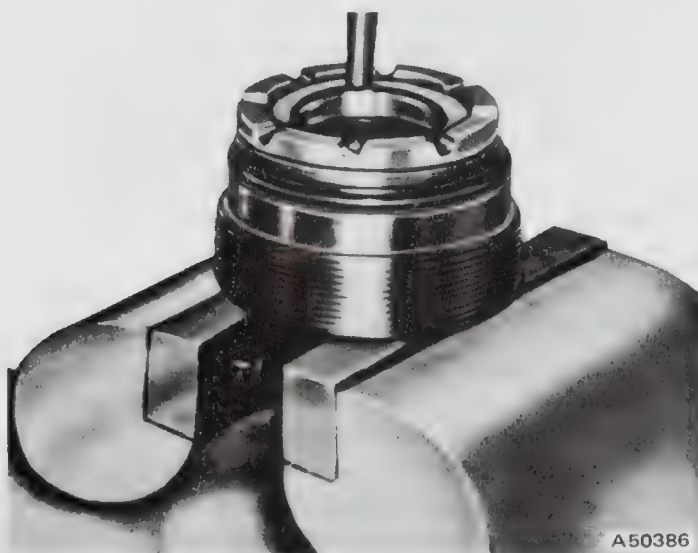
K-94 Adjuster Plug Bearing Retainer Installation
